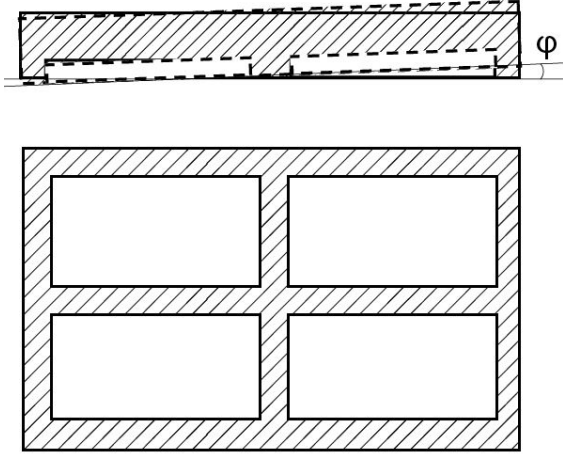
A side section and bottom view of a multi-recess bearing tilting under an angle ϕ .
